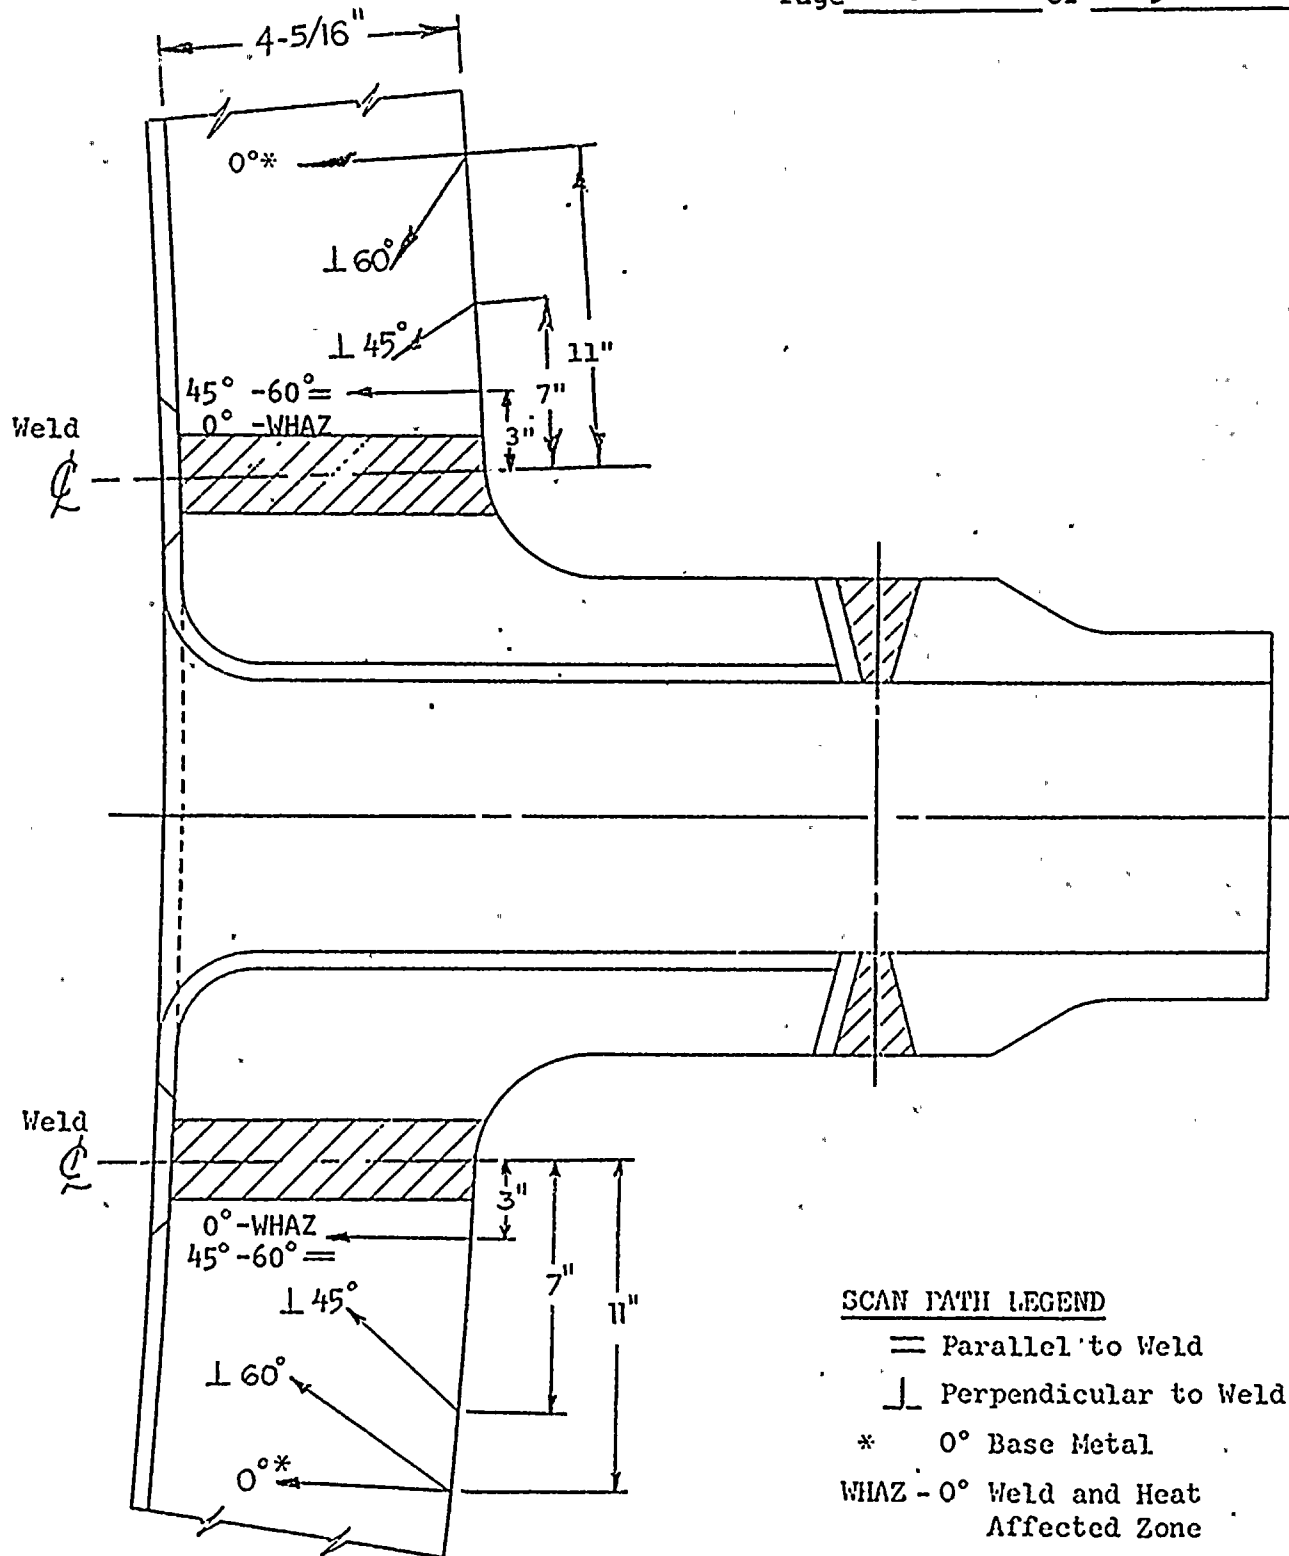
Ultrasonic Examination of Closure Head to Vent Nozzle Weld.
